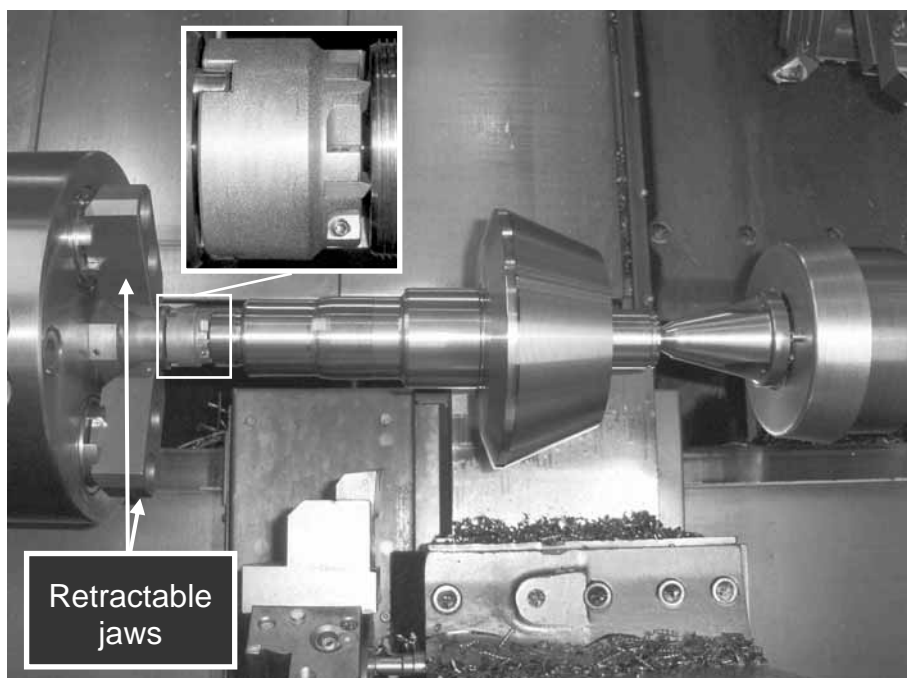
Pinion between centres in a machine tool for turning. To the left is the face driver (enlarged view) engaged into the pinion end surface. The retractable jaws are withdrawn.
